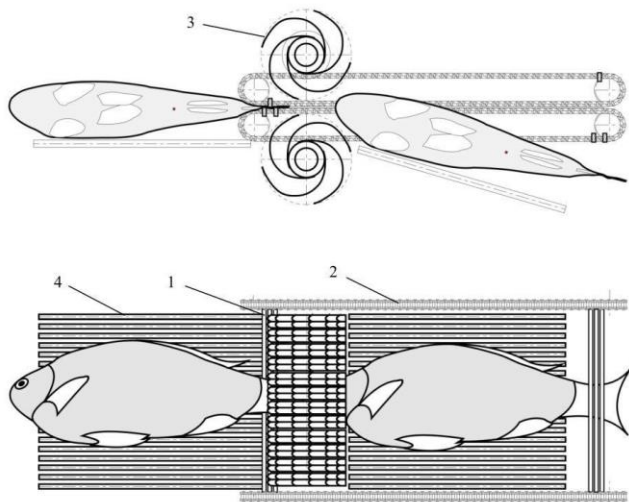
Concept of fish transport with scraping tool and braking rollers: 1 - braking roller, 2 - elastic scraper (own elaboration)
